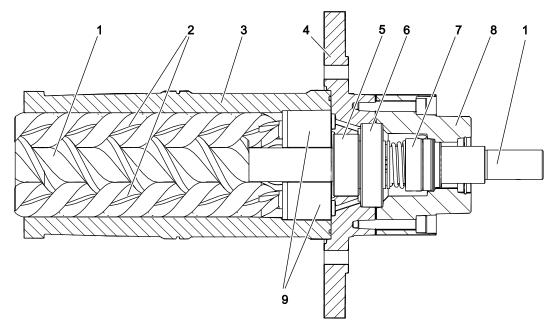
CLE 15 – 660, CLE 880 structure, inner bearing
